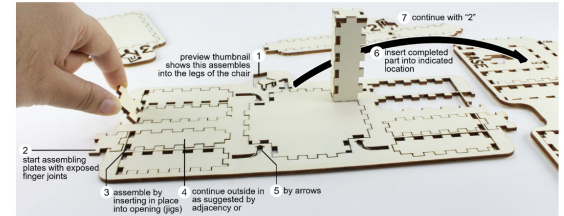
Our software tool Roadkill converts 3D models to 2D cutting plans for laser cutting—such that the resulting layout allows for fast assembly. Roadkill achieves this with the help of a visual language that conveys assembly instructions directly in the generated layout and by collocating plates to be joined, thereby minimizing visual search.
